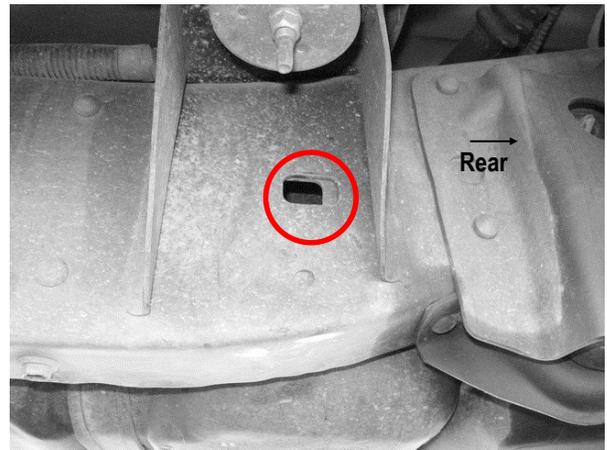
Driver Front Mounting Bracket (DFM) Installation
